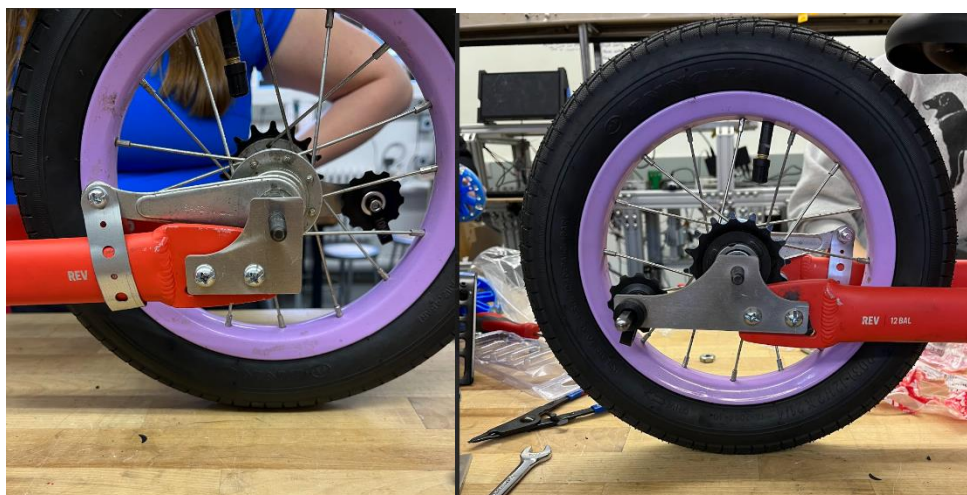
Aluminum Back-Wheel Brackets Assembled on Bicycle
